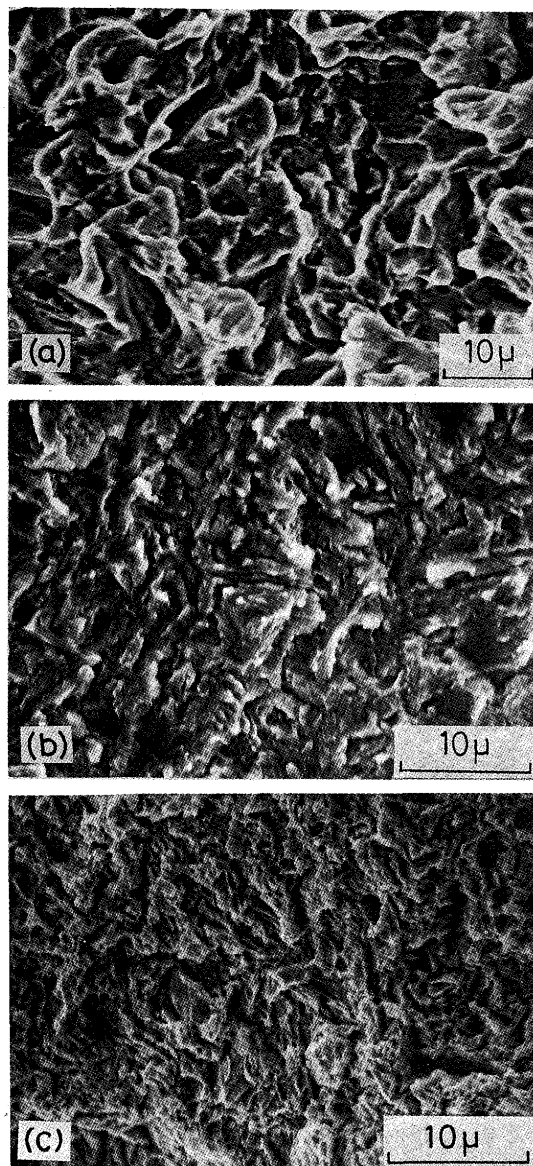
Morphologies of cleavage fracture and hydrogen embrittlement fracture.
